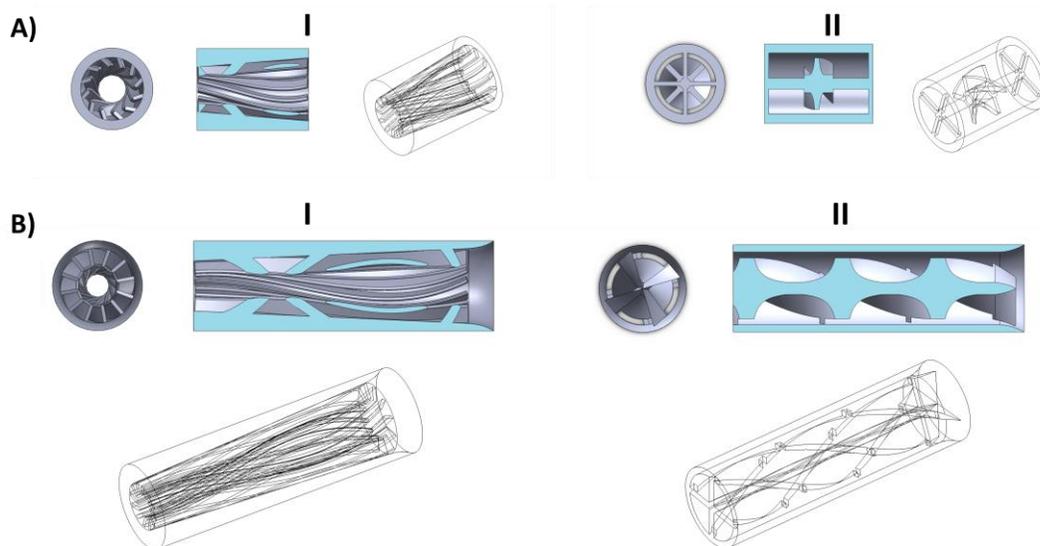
Turbine-like nozzles designs: I – nozzle with perimeter blades, II – nozzle with two intersecting twisted blades. A) Design for the SAF-23 reciprocating compressor test installation, B) Design for the DEMAG.DS-40 screw compressor test installation.
